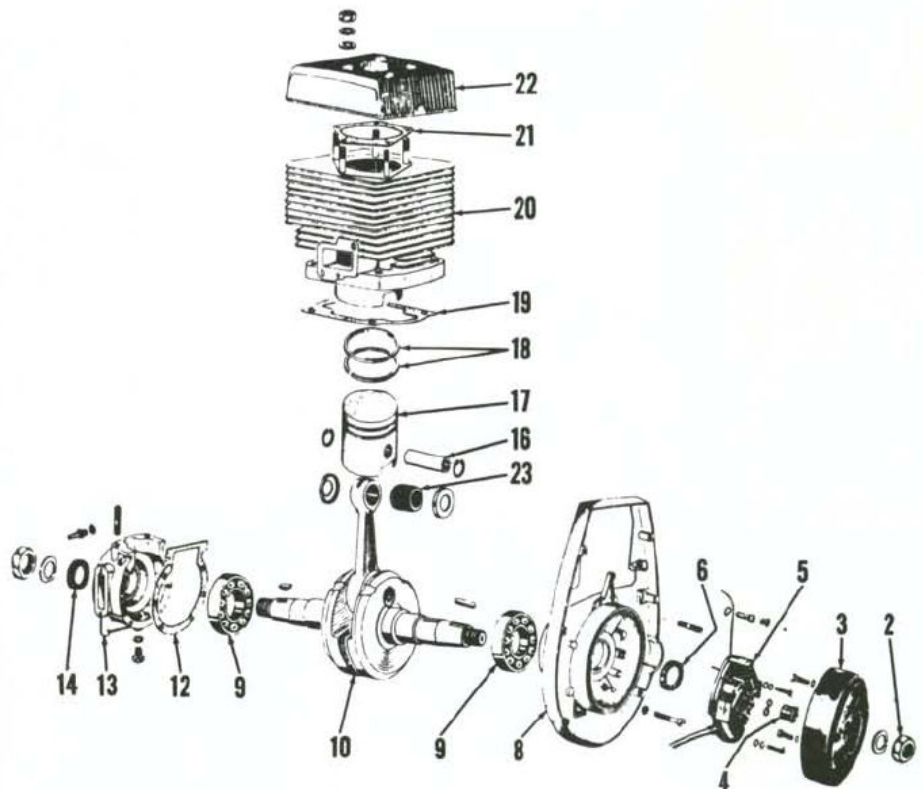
Exploded view of JLO L297 engine. All engines except L252 and L152 are similar. For parts identification use Fig. 11 except for: 23. Needle roller bearing.
